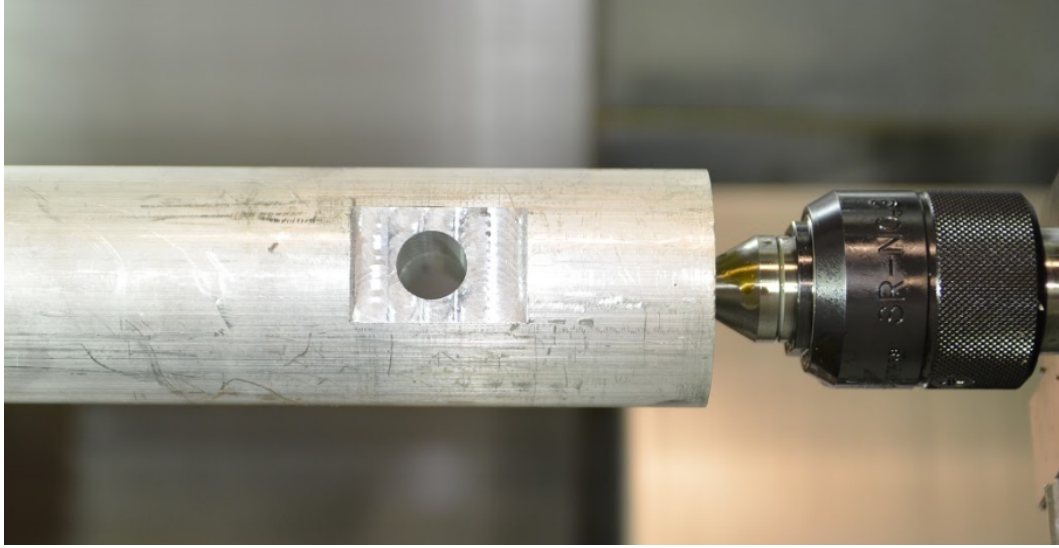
Cylindrical bore manually machined out of aluminum bar stock.
